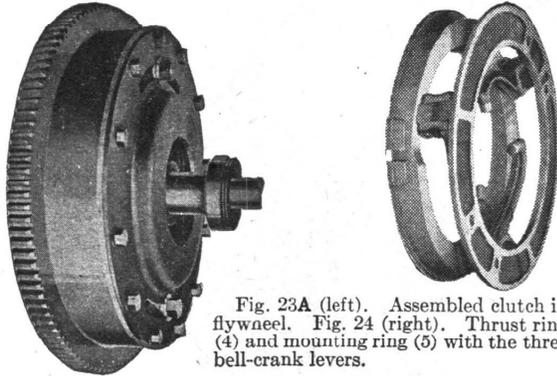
A (left). Assembled clutch in flywheel. Fig. 24 (right). Thrust ring (4) and mounting ring (5) with the three bell-crank levers.
